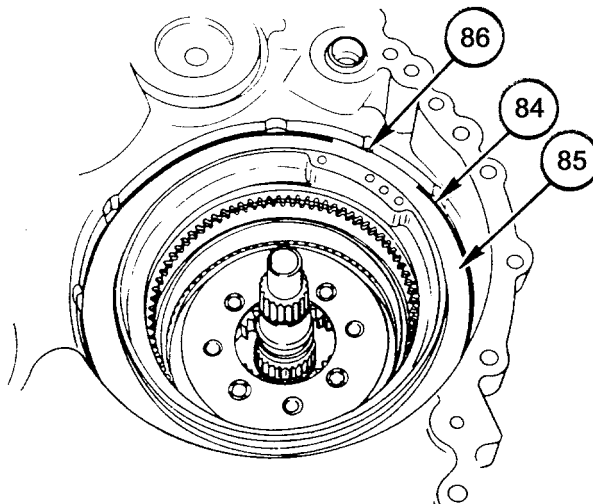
Third Clutch Piston Housing Assembly and Retaining Ring (Repeated)
